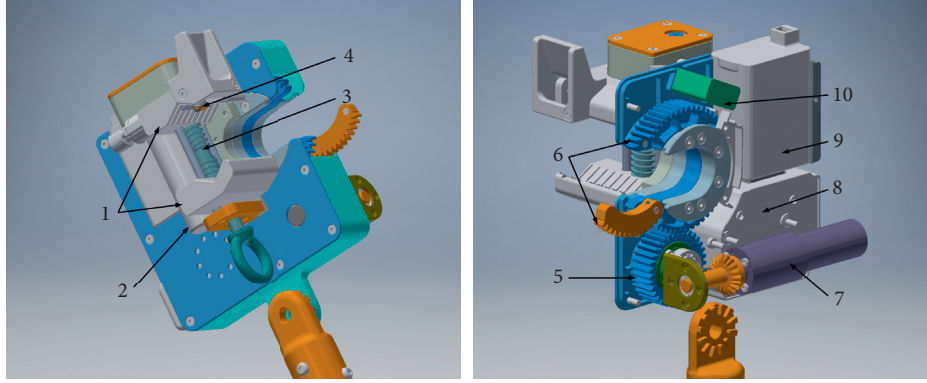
Schematic diagram of cable peeling structure. (1) Cable clamping block; (2) cable clamping motor; (3) bidirectional screw; (4) peeling cutter; (5) driving gear; (6) openable gear; (7) rotatory motor; (8) control system; (9) lithium battery; and (10) force sensor.
